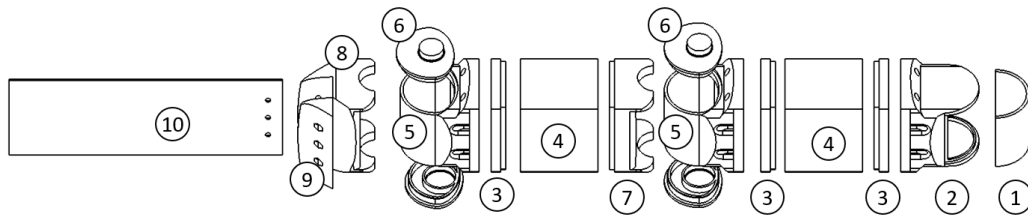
(1) front window (2) head frame, (3) electronic housing flange, (4) electronic housing, (5) joint housing, (6) joint housing cap, (7) magnet housing, (8) tail main frame, (9) tail fastening bar, (10) tail plate. (Wright et al., 2023a).
